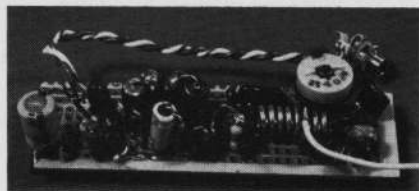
PROTOTYPE TRANSMITTER built on a small piece of board. Any construction technique may be used.
